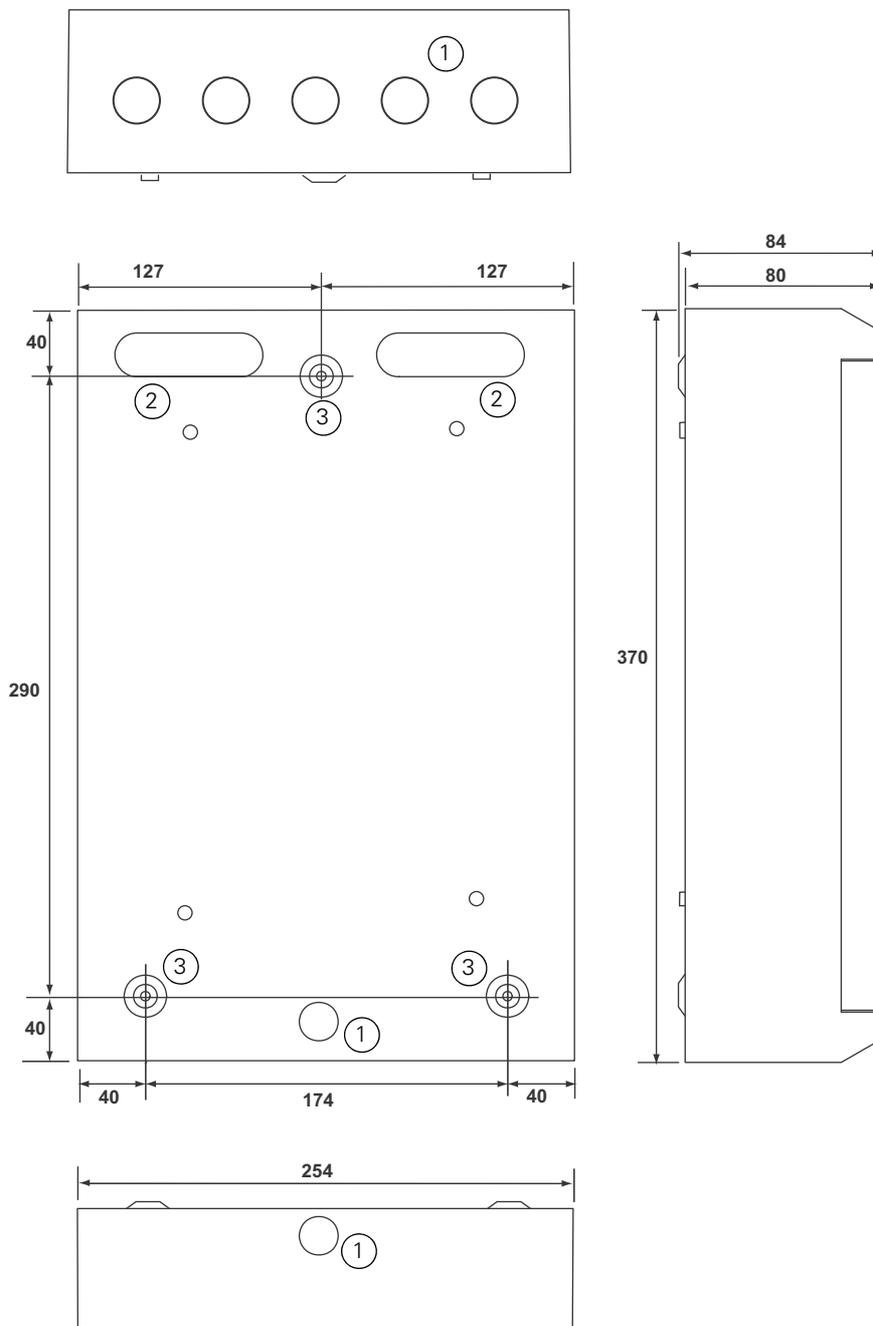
Overall and Fixing Dimensions – 240RD Repeater
